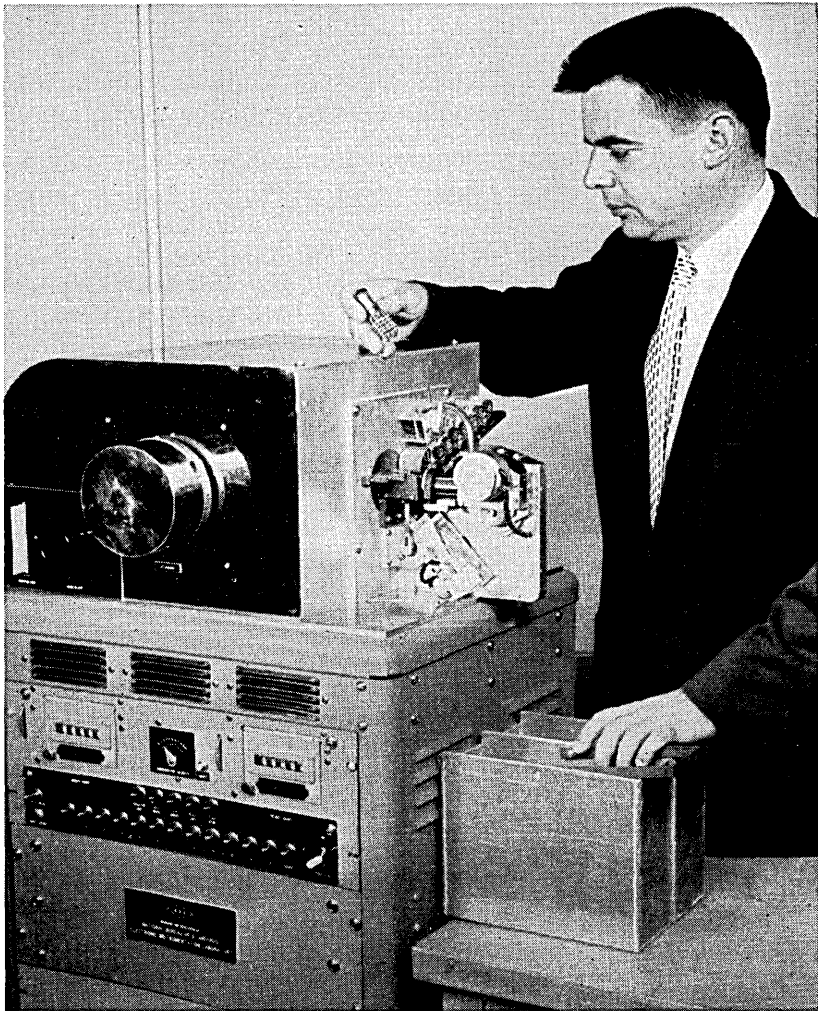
Circuit checker for completed module; the tester is set up by a punched-card programming unit and tests the module through the tube socket
